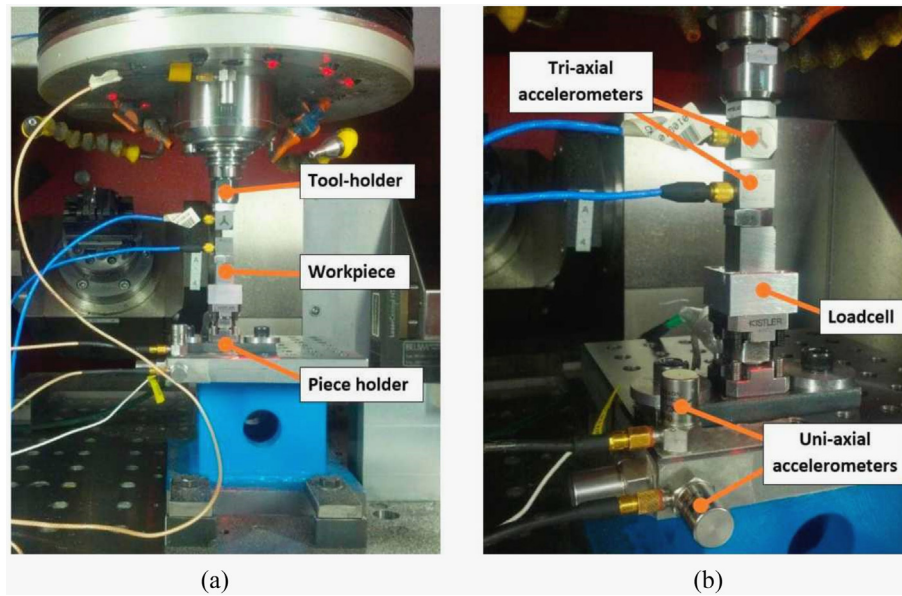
Test setup: (a) workspace area with the tool holder and the piece holder; and (b) the load cell and the piezo-accelerometers.
